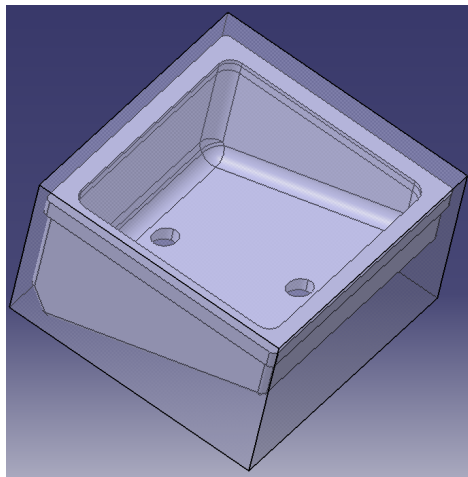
The 3D model of the *mold part - semi-finished part* assembly.
